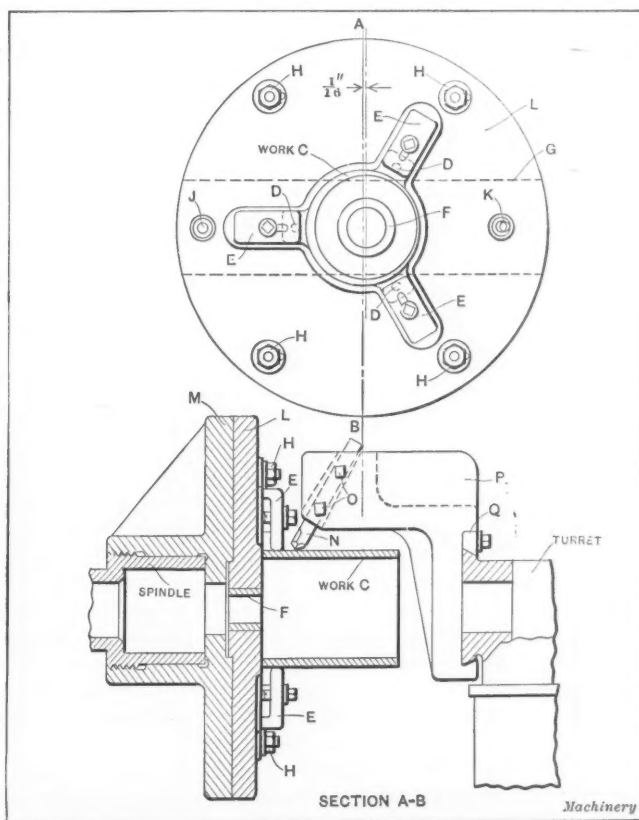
Eccentric Turning Fixture for Horizontal Turret Lathe
